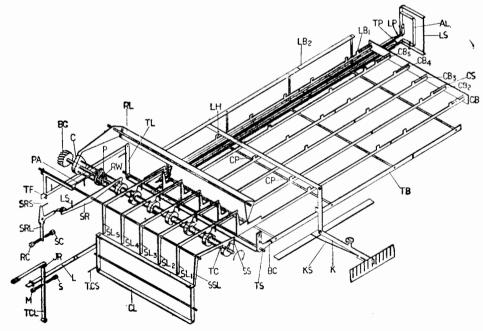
Creed Model 7 teleprinter, transmitting mechanism.
